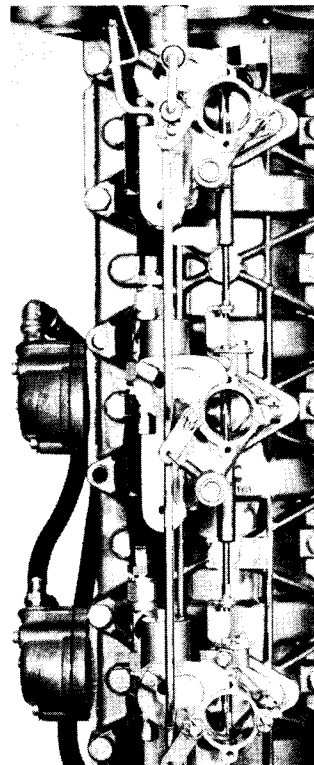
Carburetor Assemblies and Linkage Installed, Front View of Mark 75
